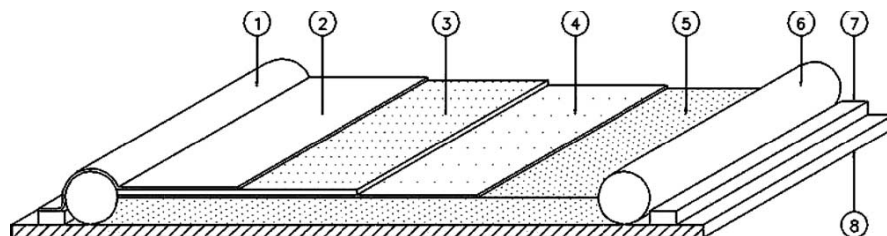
VIP mould assembly: 1-inlet, 2-vacuum bag, 3-distribution medium, 4-peel-ply, 5-reinforcement, 6-outlet, 7-vacuum seal, 8-glass mould [19]
